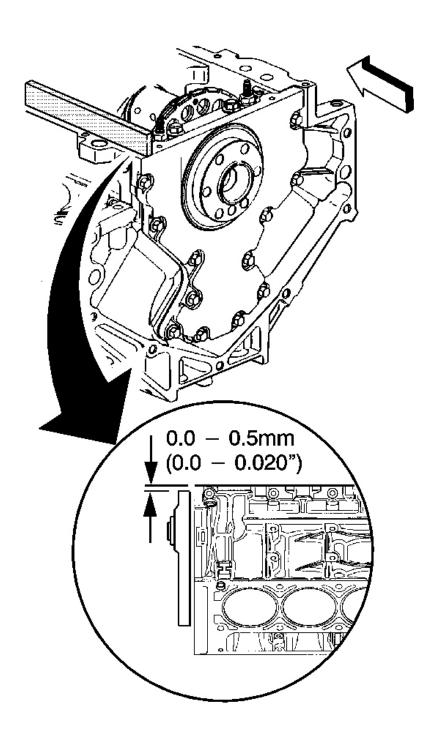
Checking Rear Cover-To-Engine Block Proper Installation Position Courtesy of GENERAL MOTORS CORP.
